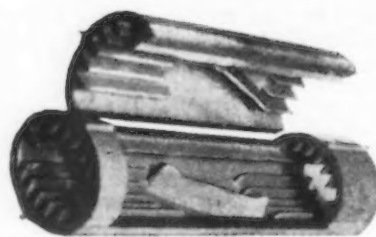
Cutaway view of cast iron section showing interior ribs and swirler fins
